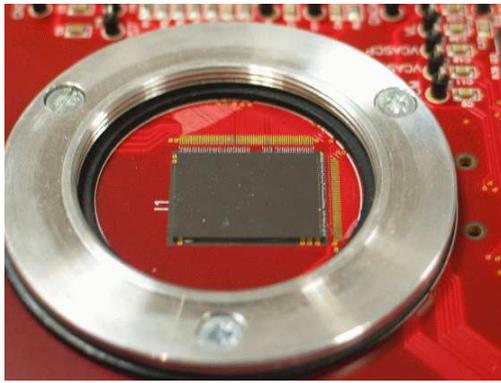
Picture of the BT Vanilla sensor bonded to PCB
